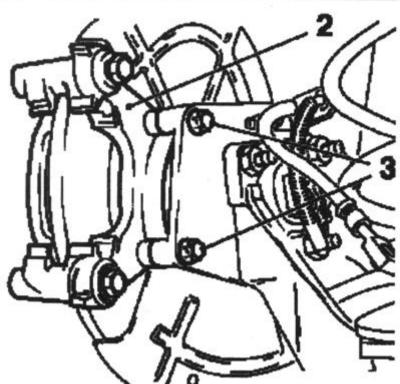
Withdrawal guide colo-dock: 1 - brake hose, 2 - guide pads 3 - Bolts
